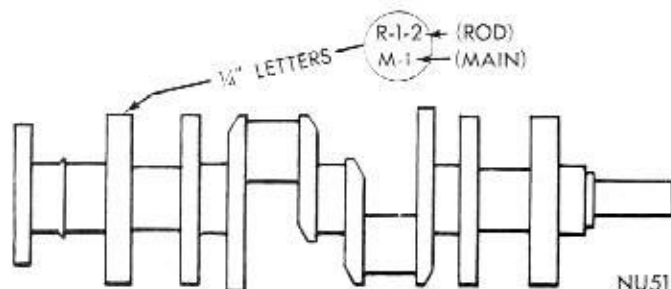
Showing Location of Internal Marking of No. 8 Counterweight
